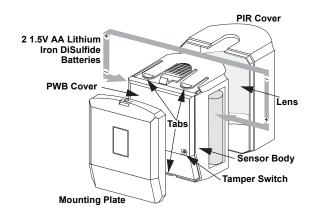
PIR Components, Battery Locations, & Tamper Switch
